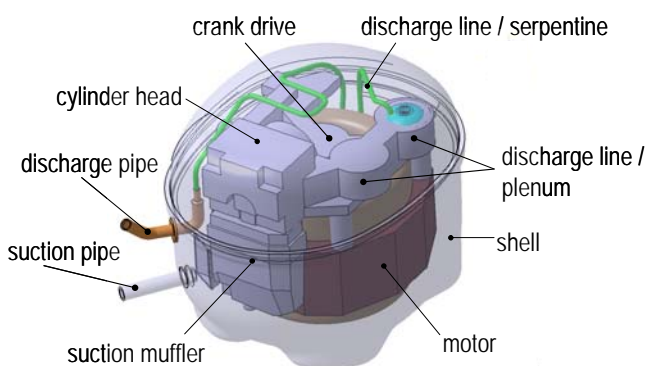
Schematic view of a hermetically sealed reciprocating compressor
